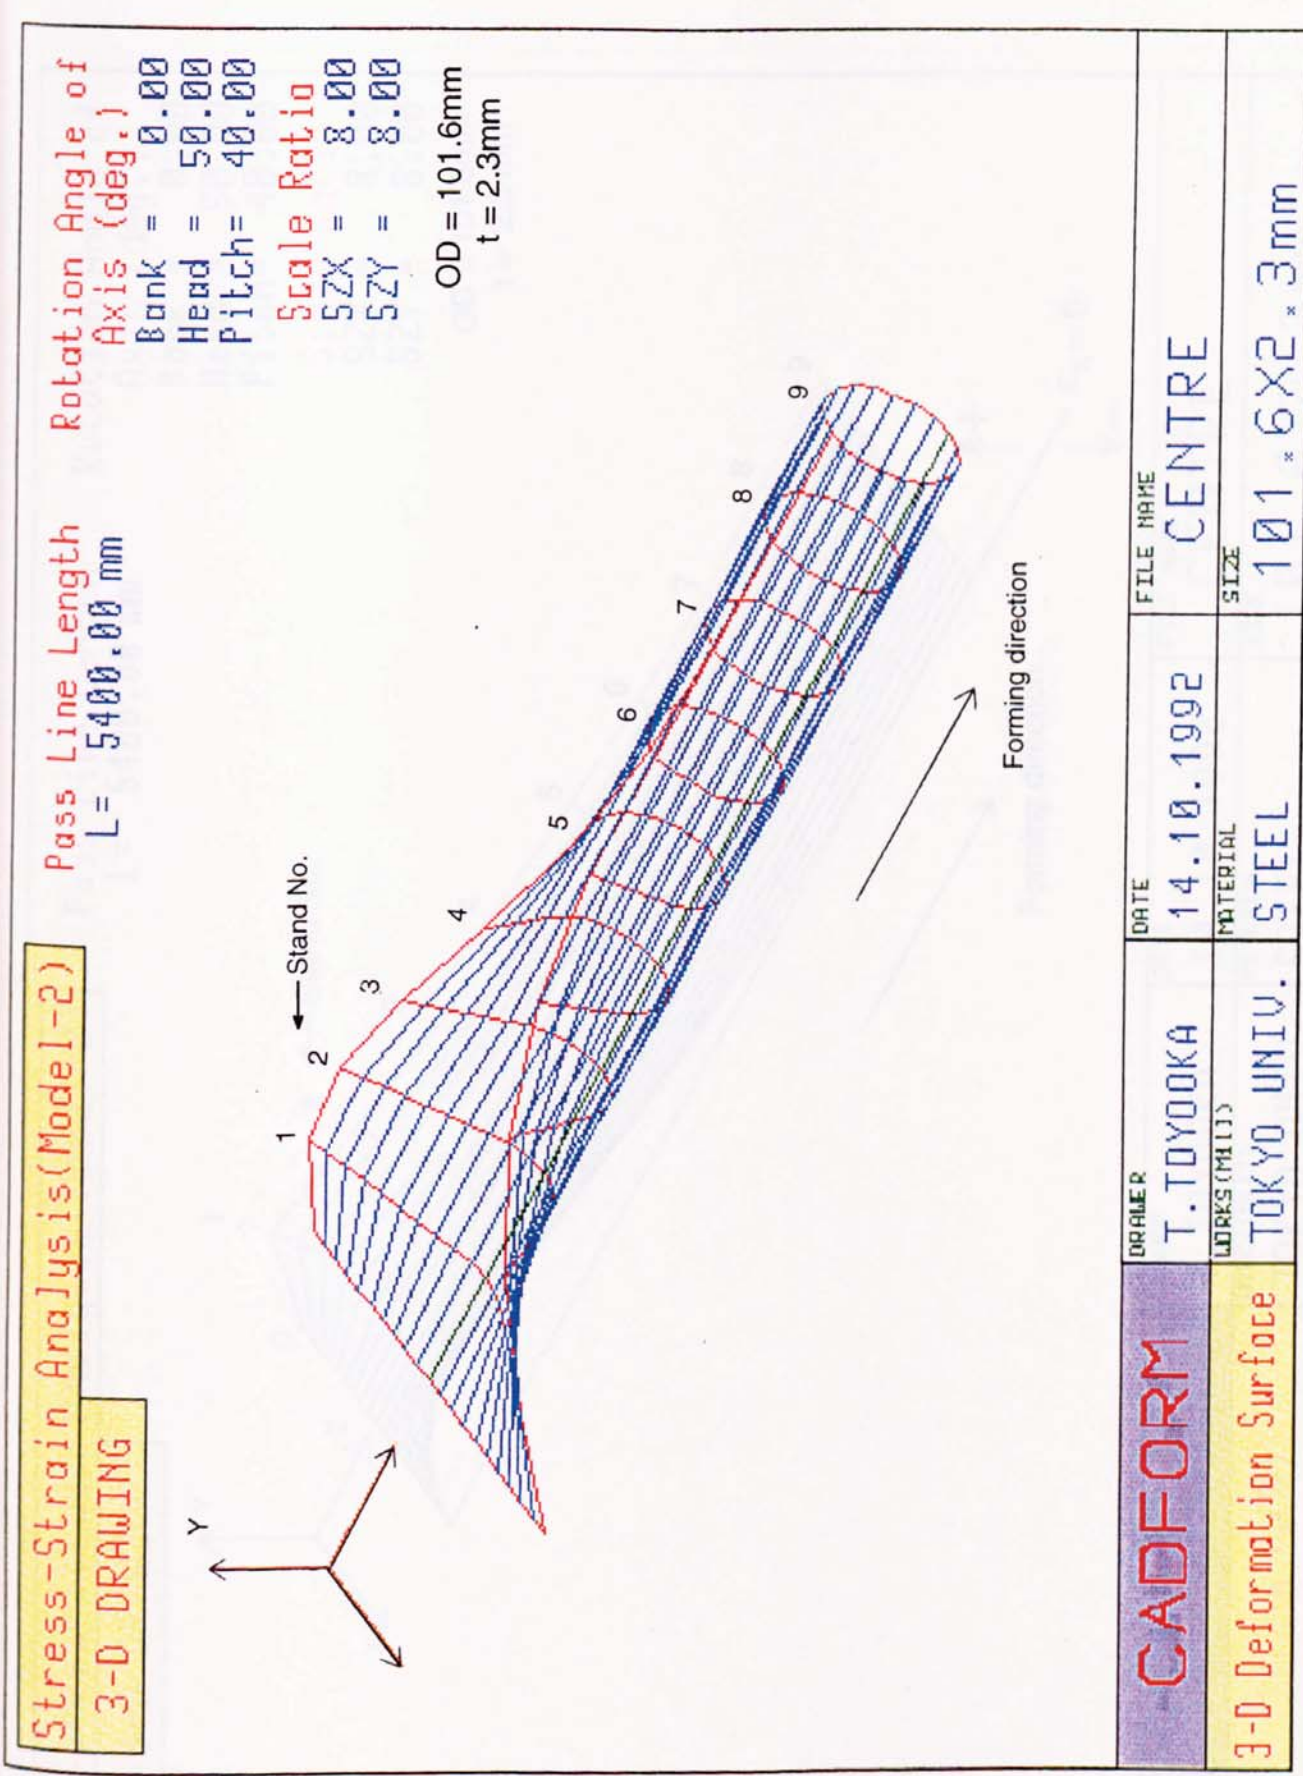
Computer graphic drawing of 3-D deformed surface of the strip for centre bending flower pattern
